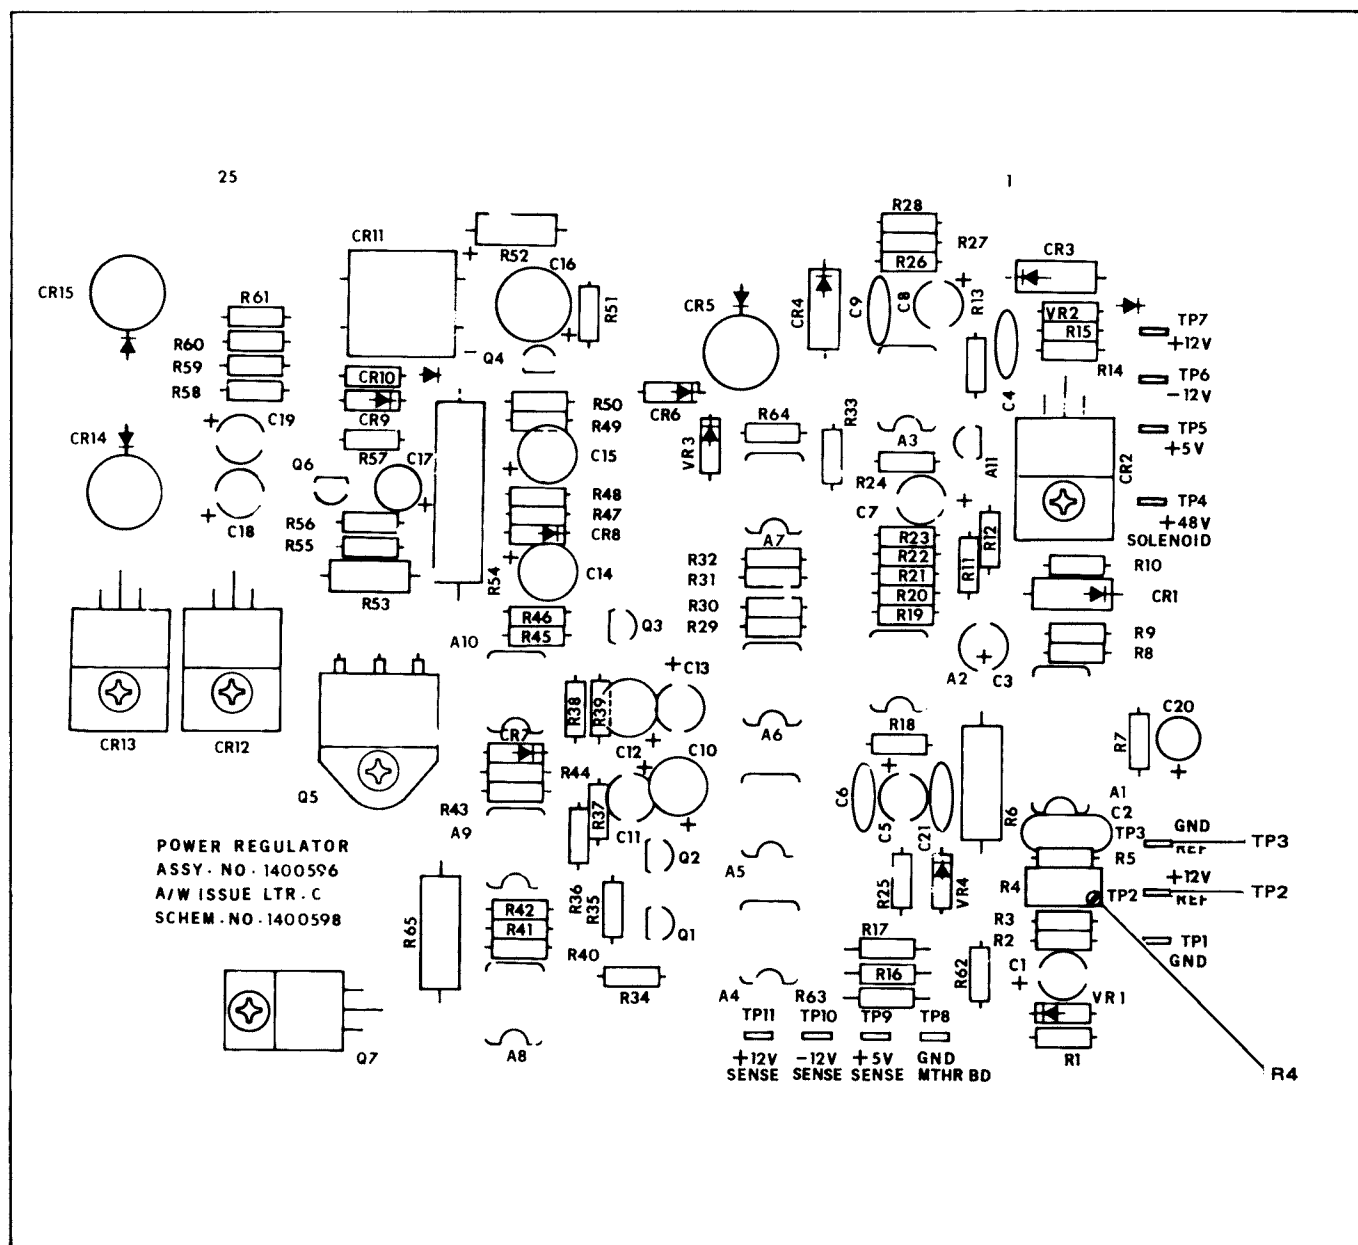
Power Supply Regulator PWA, Assembly No. 1400596
